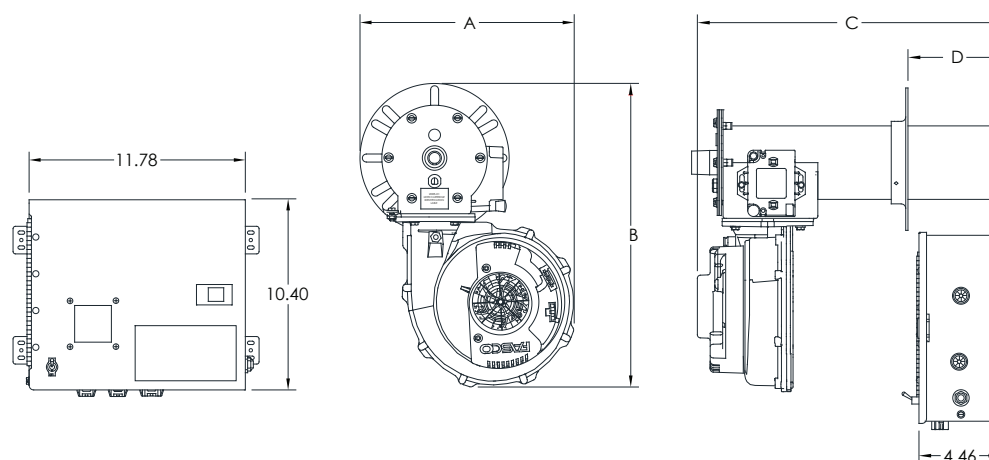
Mounting Flange Dimensions (MHTD 4" & MHTD 6")
